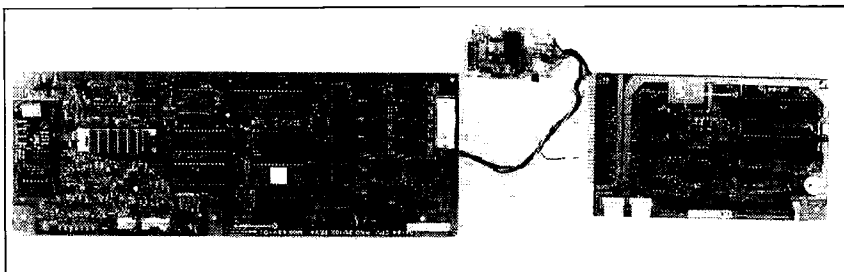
Photo B. You can safely solder the leads from the Digicom modem (top) to the solder side of the SX-64's CPU board (left) and I/O board (right), using a low wattage, grounded iron. Work patiently, use solder sparingly, and avoid bridges.
